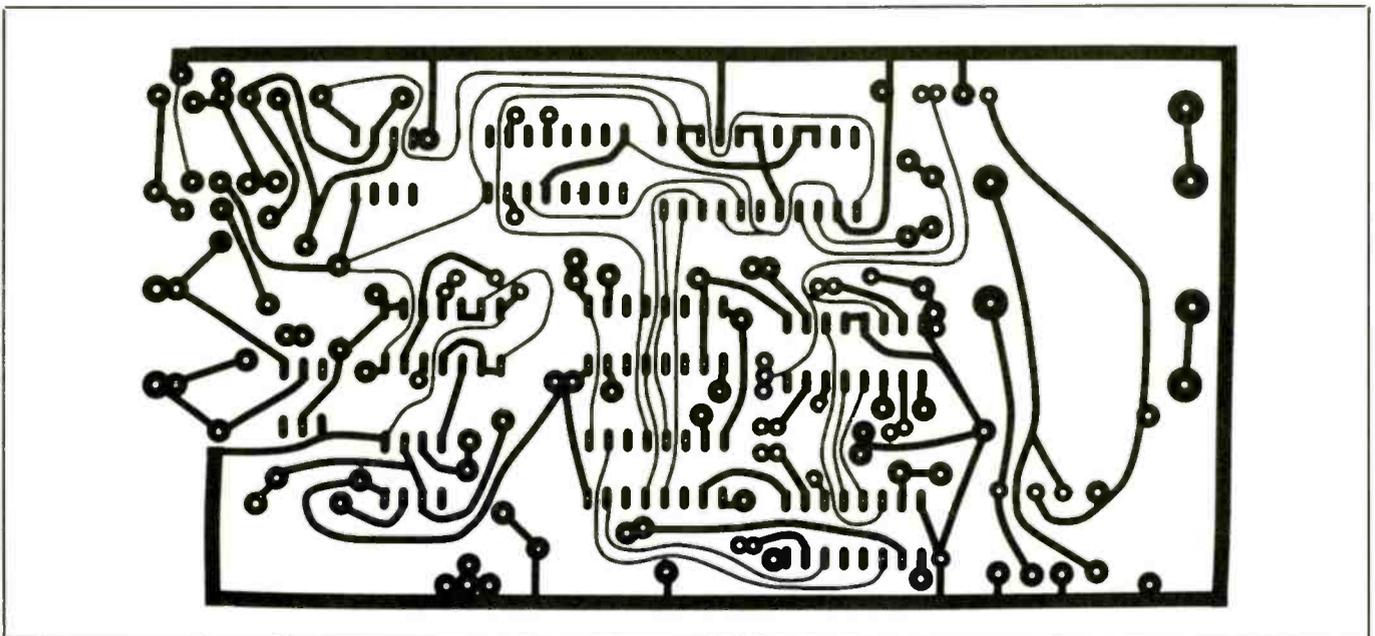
Actual-size etching-and-drilling guide for main printed-circuit board.
